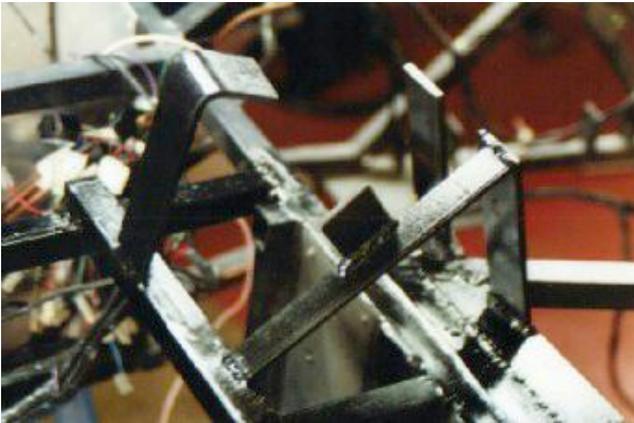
Welded to the chassis (front top) of footwell area, there is one guide hole for
